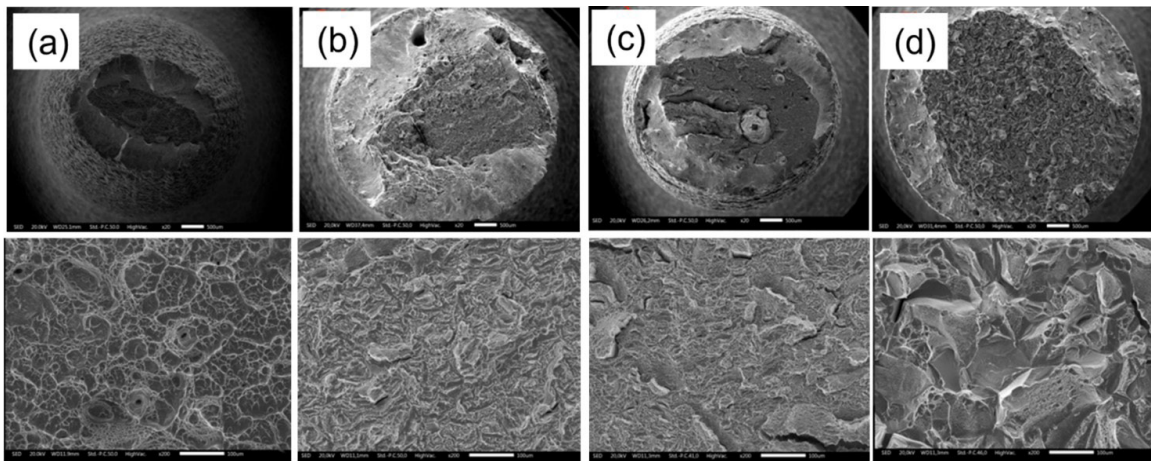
Fracture surfaces of tensile specimens at low and high magnification of a) AB, b) AA, c) DA and d) STA.
